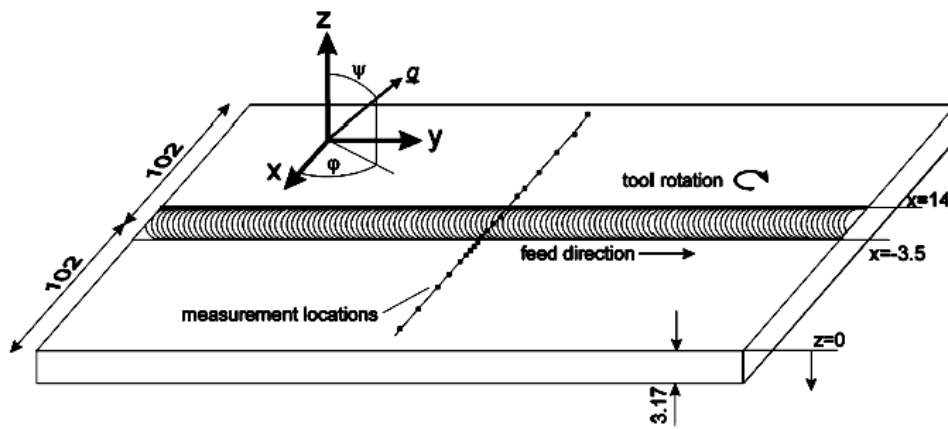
Schematic of the weld dimensions and residual stress measurement locations.
